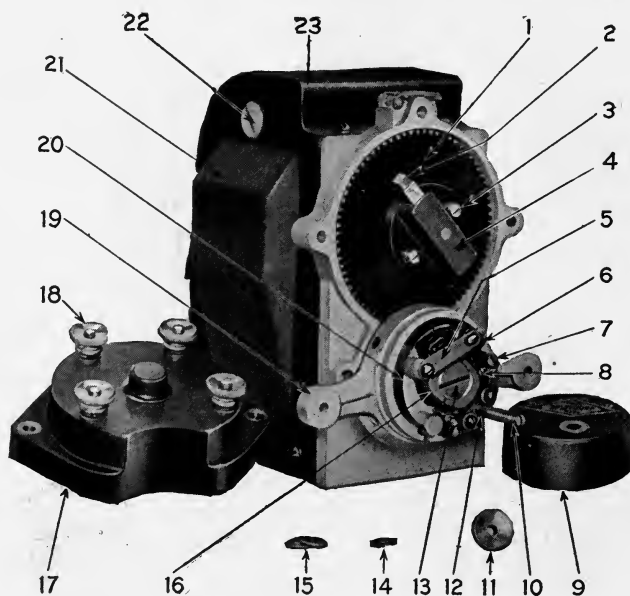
Aero magneto with distributor block and interrupter cover removed.
